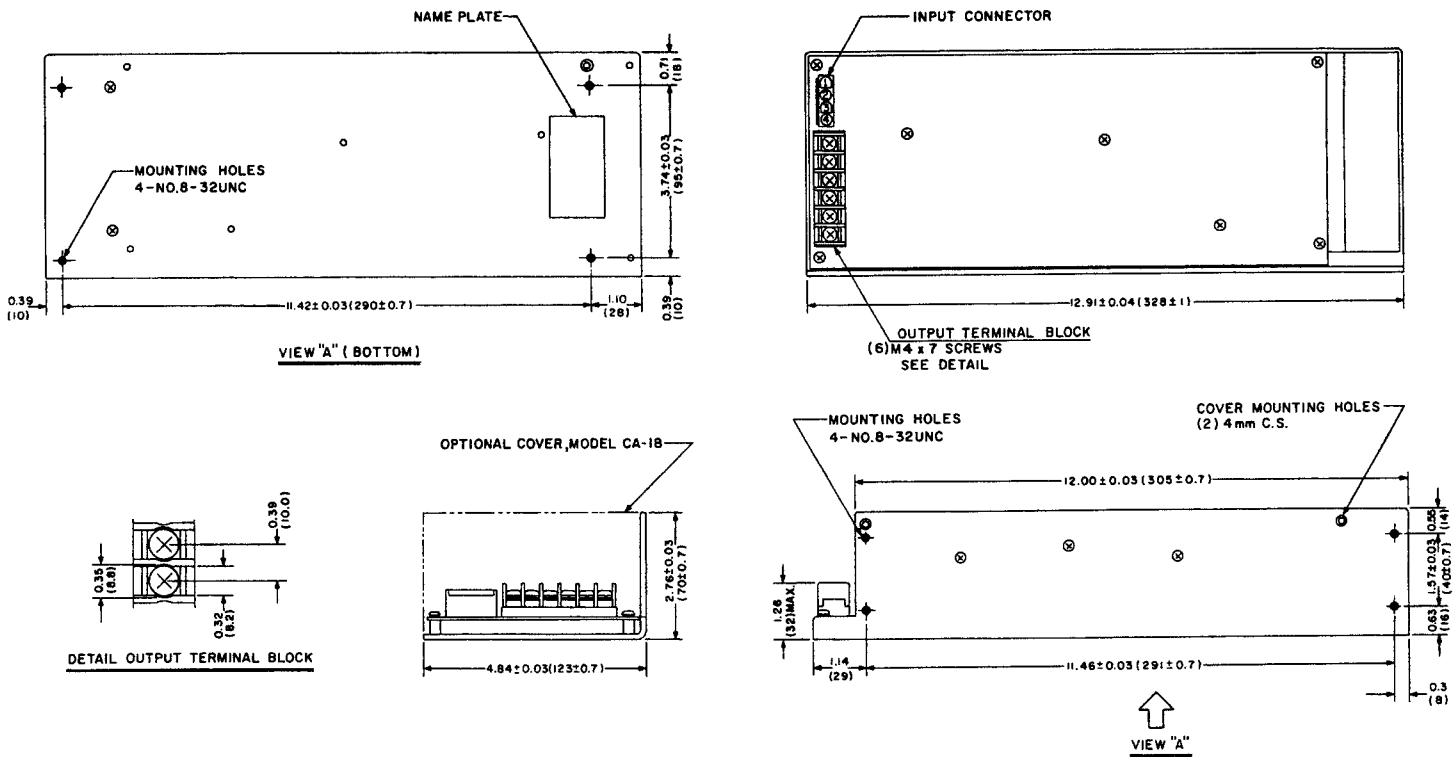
MECHANICAL OUTLINE DRAWING, ERX-240W SERIES, WITH (OPTIONAL) COVER.
